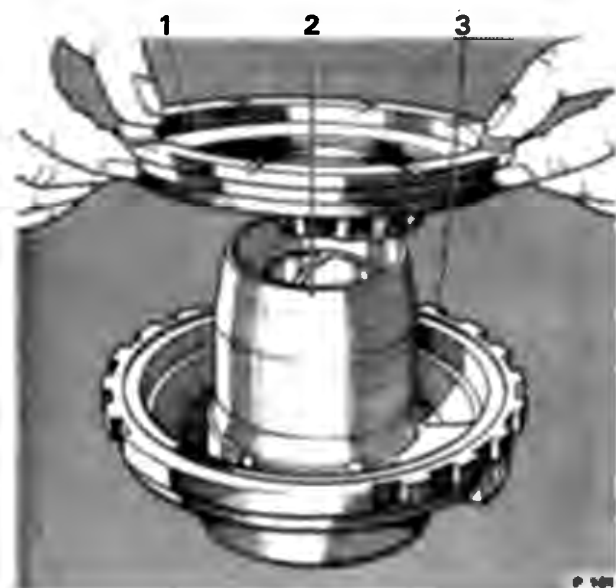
FITTING THE INTERMEDIATE CLUTCH PISTON
